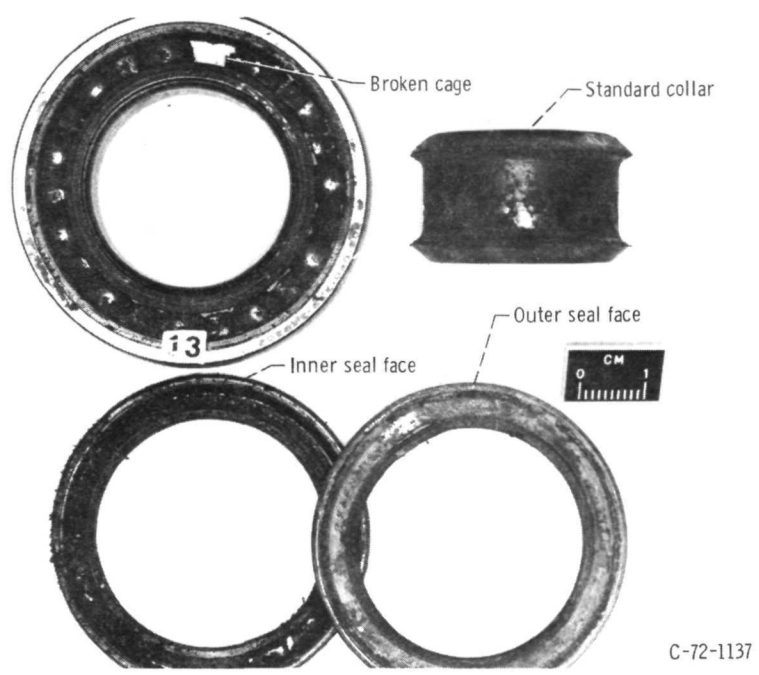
Failed bearing showing dust impregnation and broken retainer (cage).
